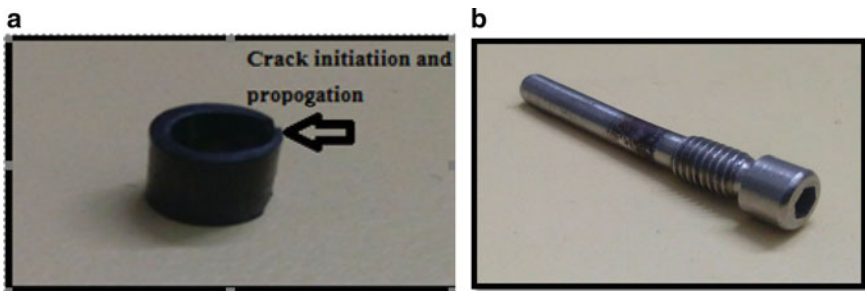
a Wear and fracture of a bush; b wear of the pin
